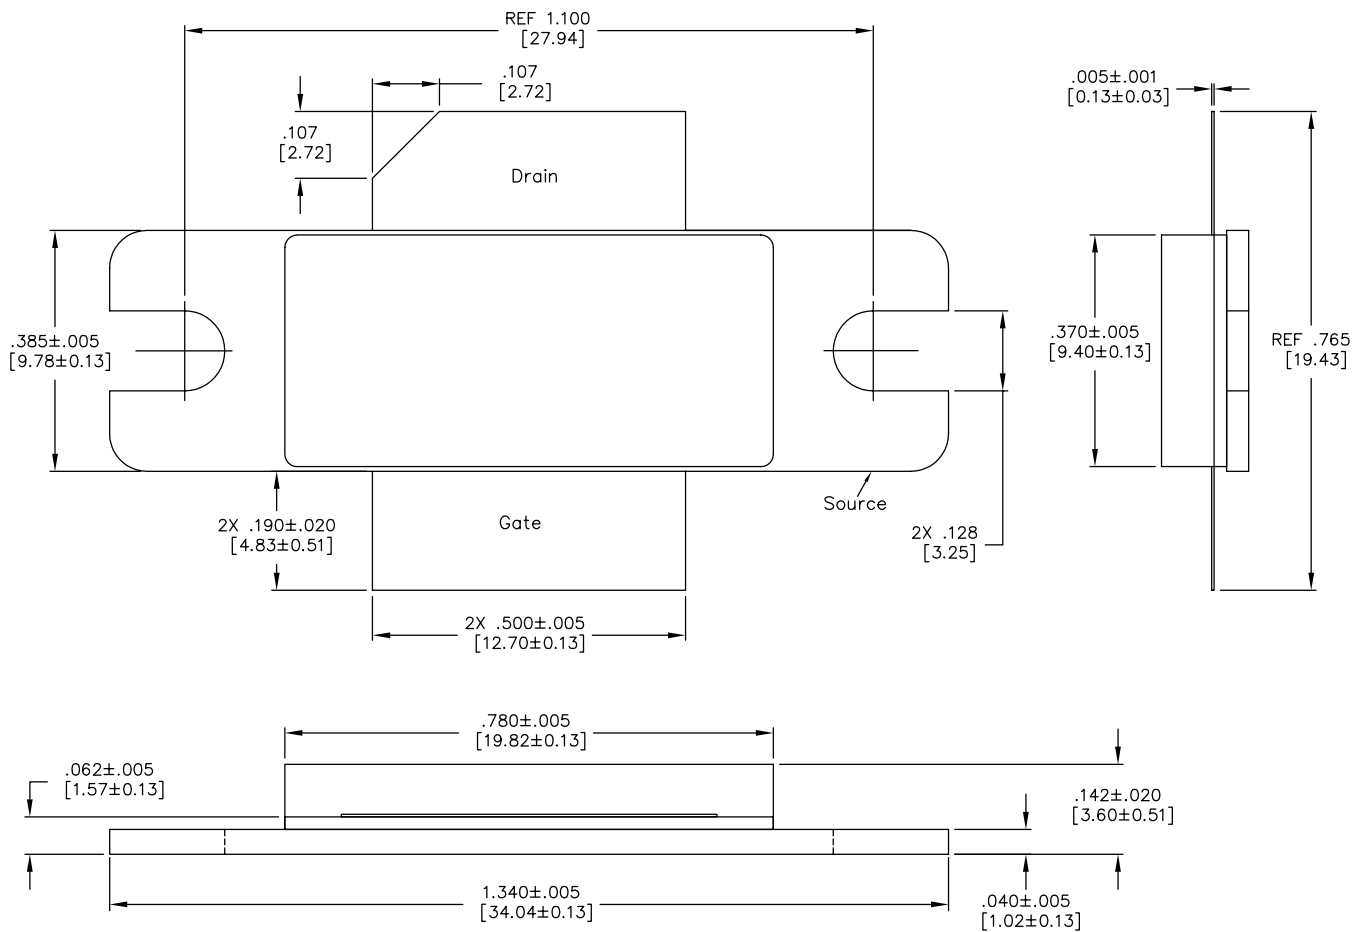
AC780B-2 Metal-Ceramic Package Dimensions and Pinout (all dimensions are in inches [mm])
